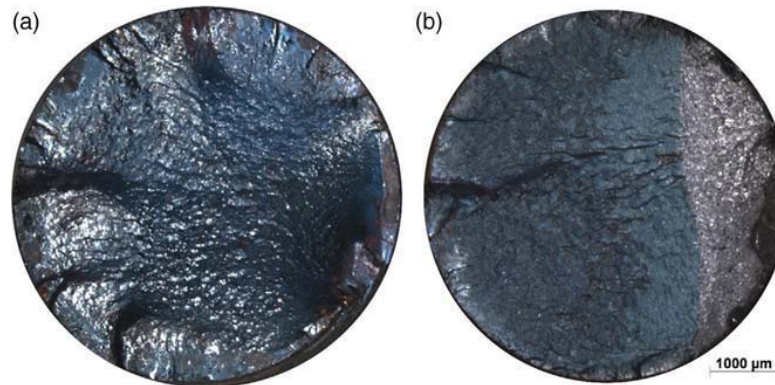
Stereo microscopic micrograph of the oxide covered fracture surface of a) TMF-tested alloy A and b) TMF-tested alloy B.
